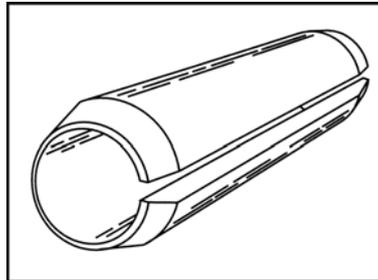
, MS16562 spring steel rollpins are often used in the movable joints of aircraft seats.
